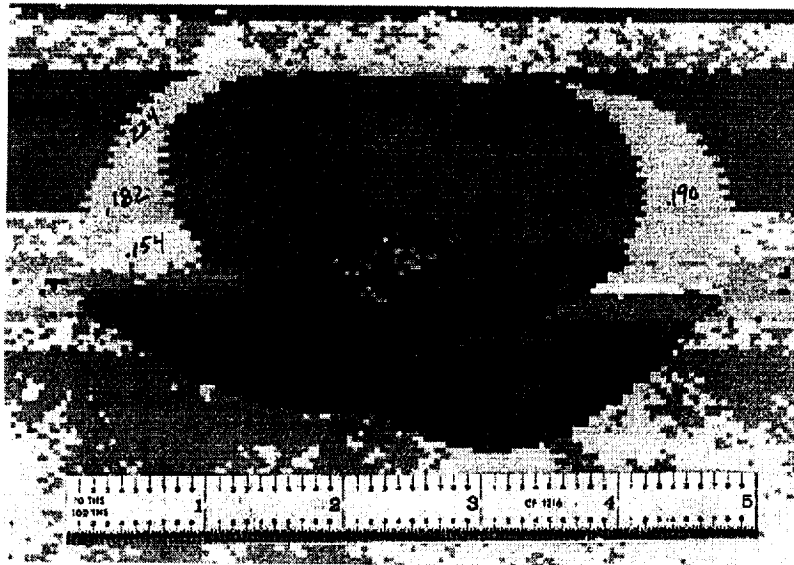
Typical TOF image for I-beam/plank/skin delamination
